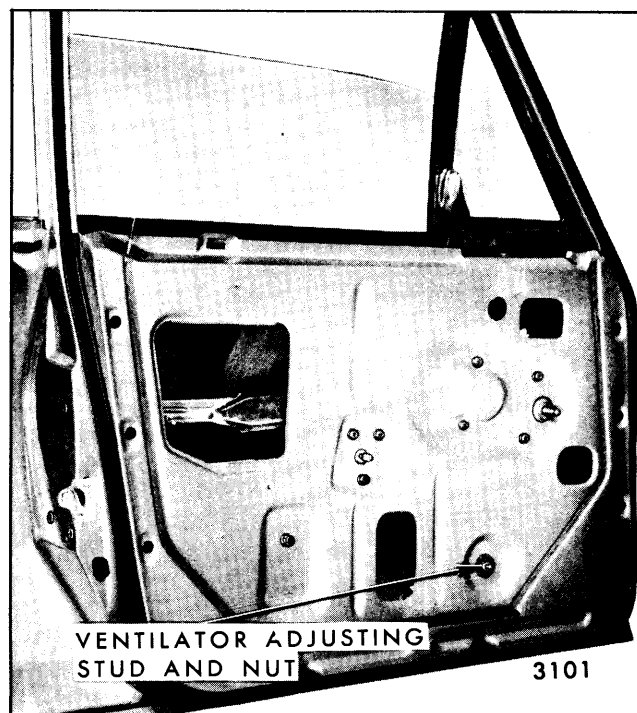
Front Door Window Removal and Adjustment - "A and X" Closed Styles
